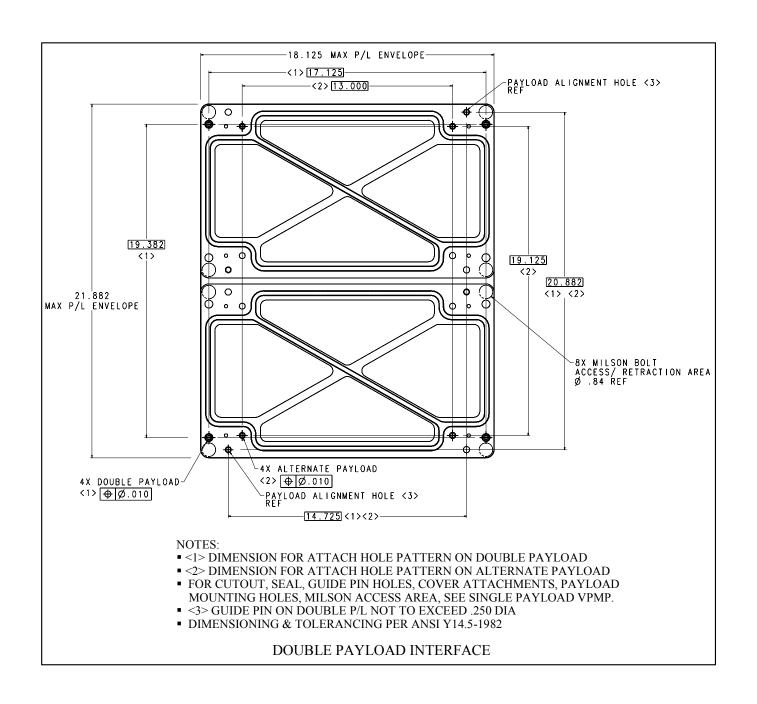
VENTED PAYLOAD MOUNTING PANEL (SHEET 3 OF 3)
